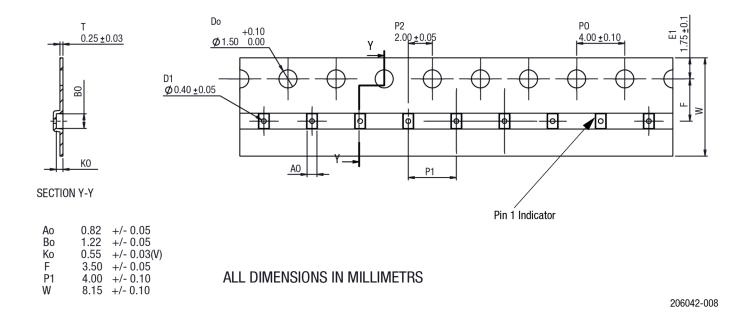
SKY59608-711LF Tape and Reel Dimensions
